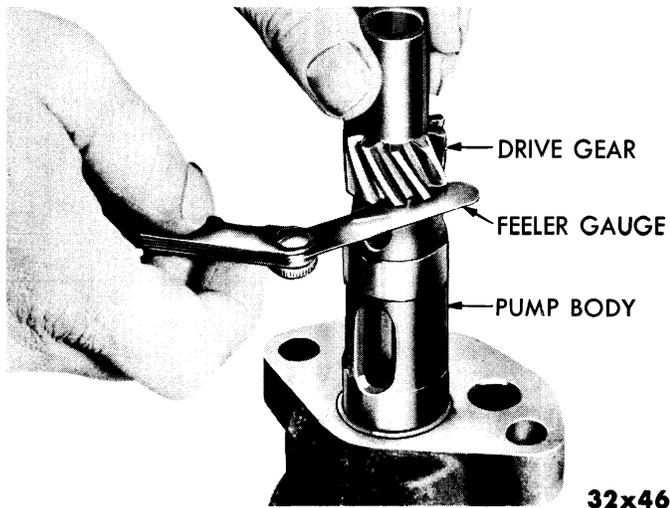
Measuring End Play of Oil Pump Drive Shaft—6 Cylinder Engine
